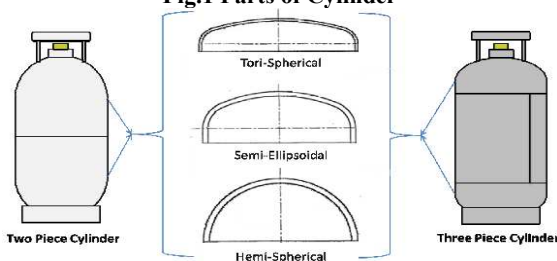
Types of dooms in two and three piece cylinders Cylinder design
